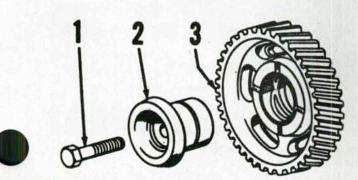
View of idler gear (3) and adapter shaft (2). Bushing in gear is not available separately.
